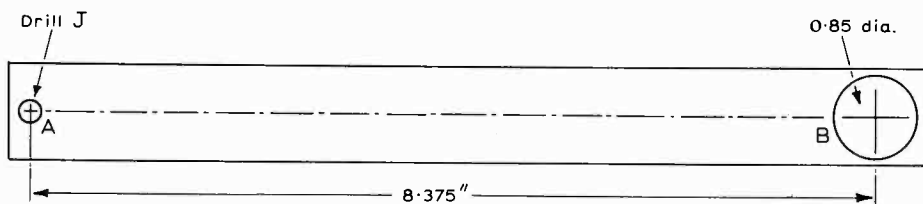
When turntable and pickup arm are assembled place hole A over spindle and hole B over pickup arm pillar. Draw round the base to mark selected position.
